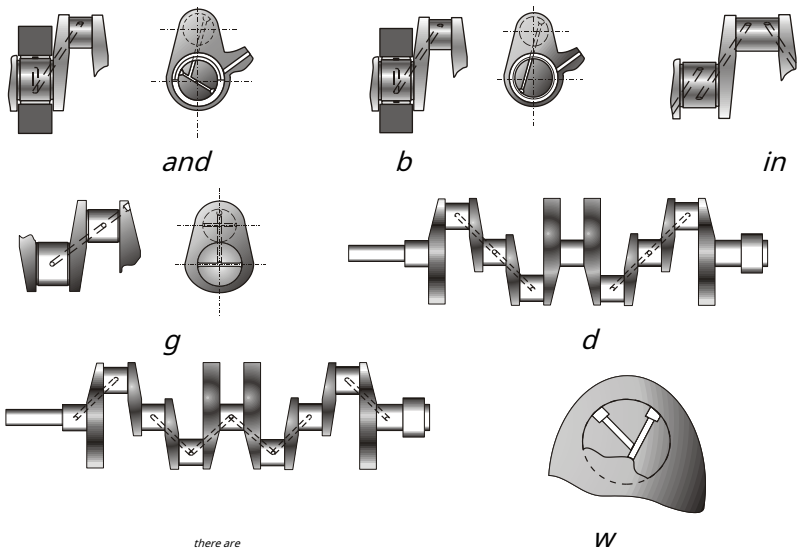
Diagrams of lubrication channels for connecting rod bearings
